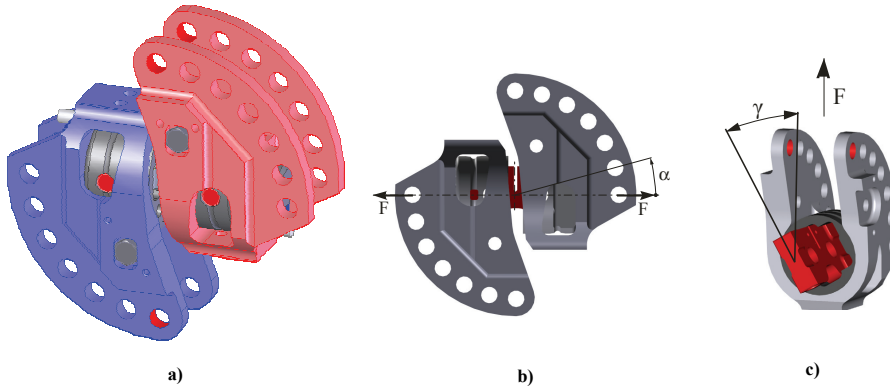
Latest version of the AFM loading device a) Fully assembled loading device b) Definition of the loading angle α c) Definition of the loading angle γ
